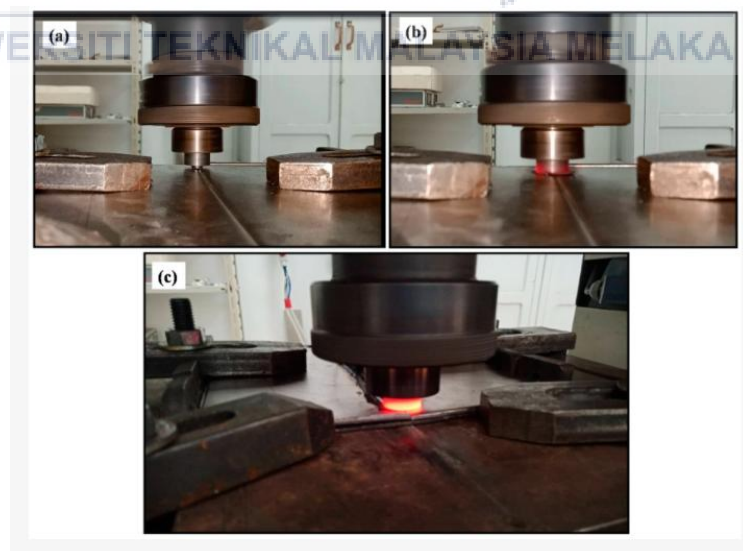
The stages of FSW steel alloy using the WC tool. (a) Initial stage of a tool plunging at the abutting edge of the two tightly clamped plates on the table of the FSW machine, (b) after plunging and traversing, and (c) at the end of the FSW and just before extracting the tool.
